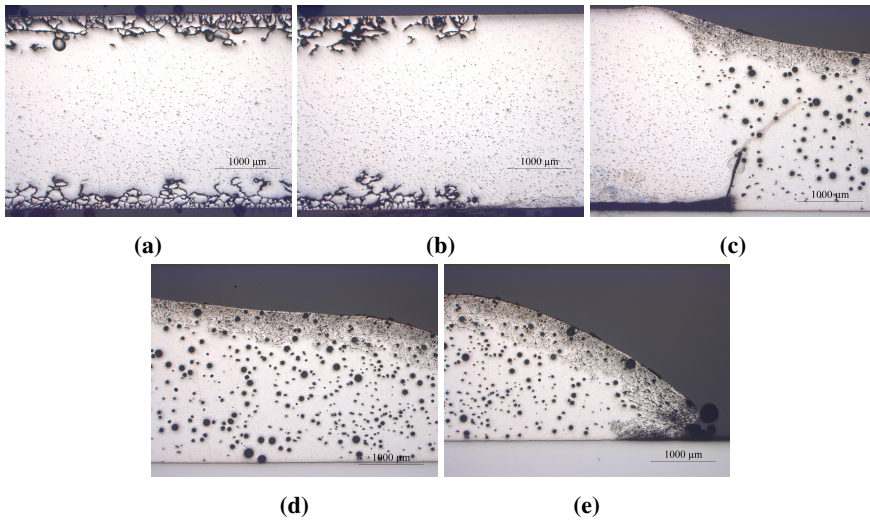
Corrosion attacks on AA6063-T6 from the base material to the filler material.
